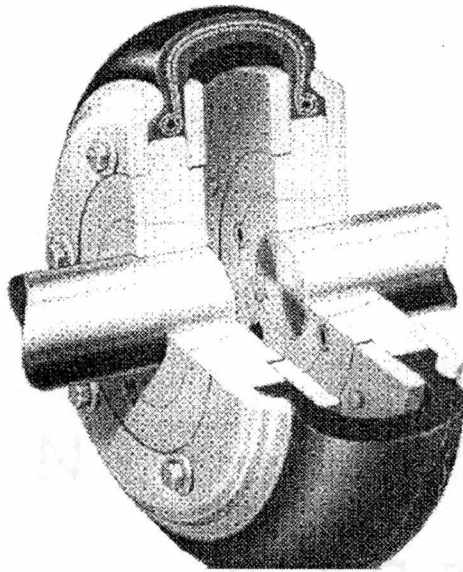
through Figure 14 show the approximate appearance of these couplings. In each of these figures part (a) shows a cross-sectional view and dimensions of the actual couplings used during testing, and part (b) shows isometric views of couplings of a similar type but not exactly like those used in testing.
